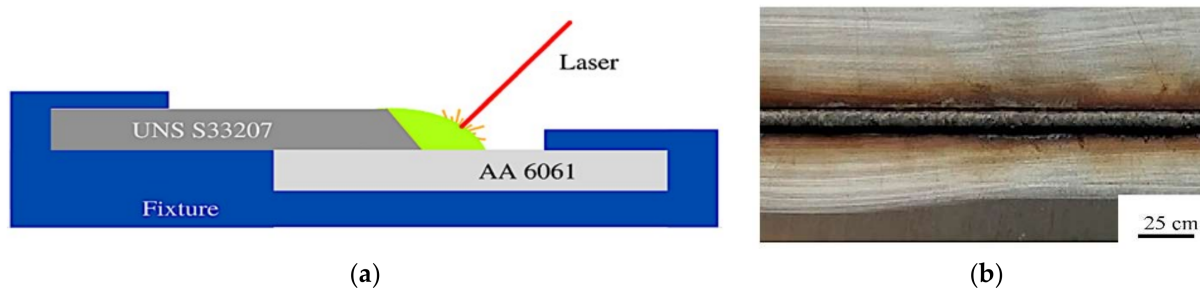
(a) Laser welding setup; (b) Laser welding plate using HEAs filler.
